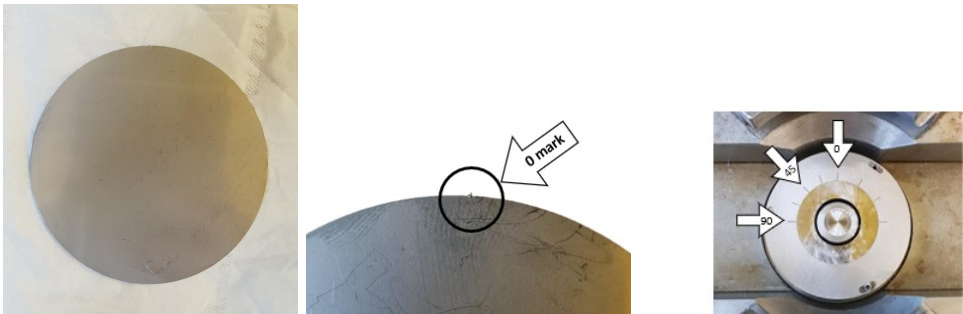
Laser cut metal sheet 1.4307 (left), 0 mark on the cup (center), and 0 mark on the deep drawing blank holder (right).
